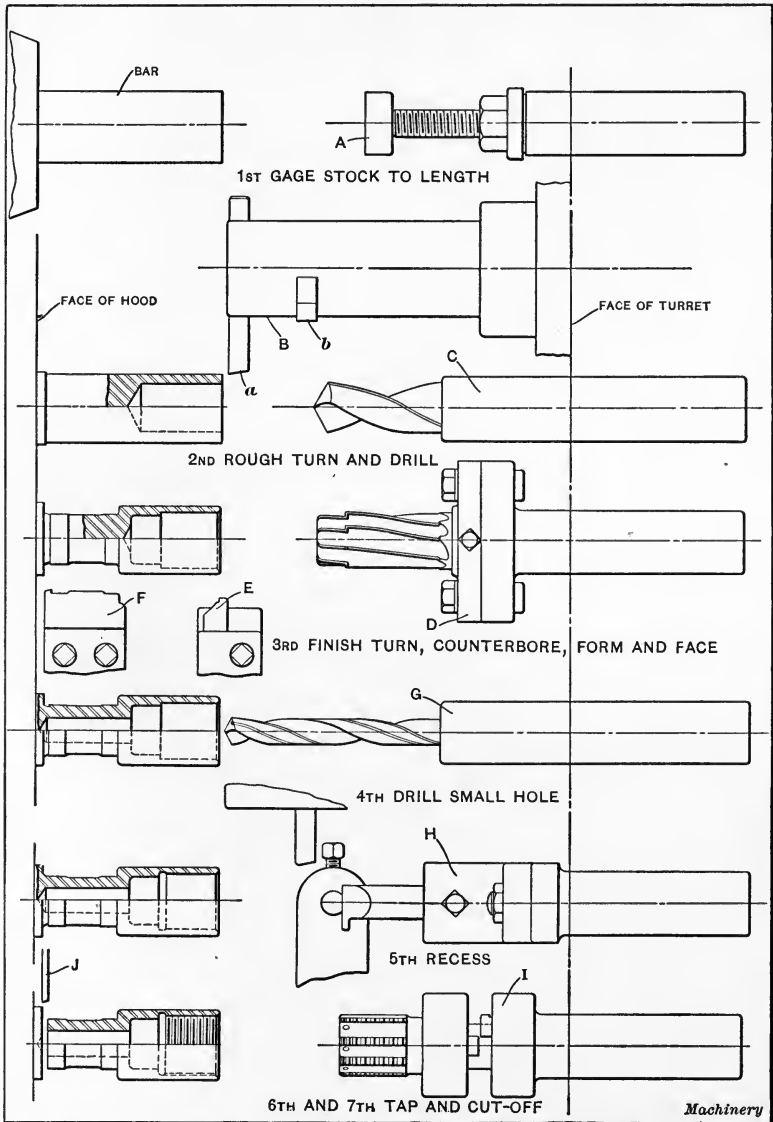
Tool Equipment and Operations for Making a Chrome-nickel Steel Sleeve on a "Model A" Cleveland Automatic
